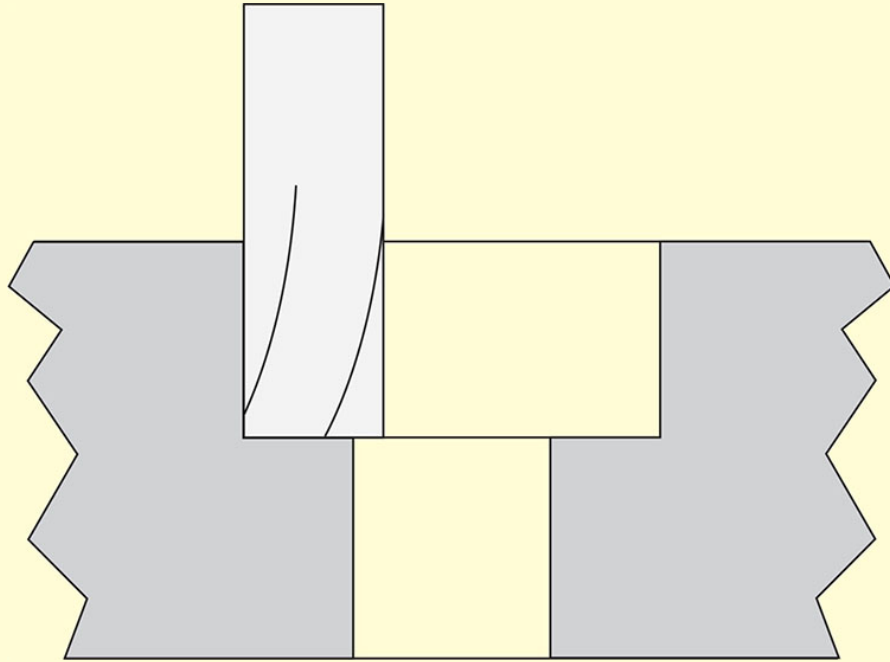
Machining the stepped recess with a cutter large enough to cut the bottom step in one pass.
